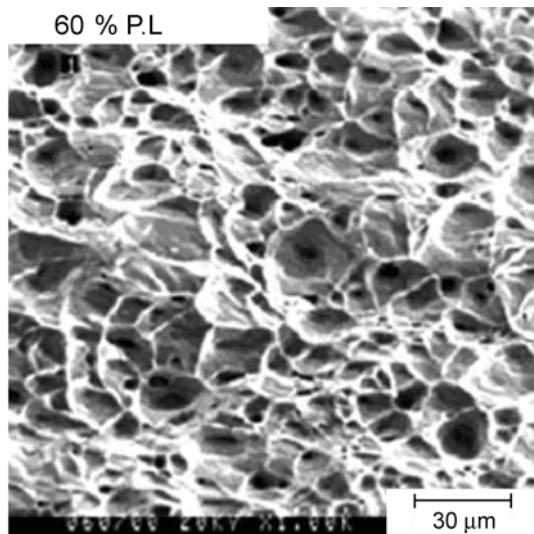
Fracture surface of the sintered compact with 60 % powder loading.
